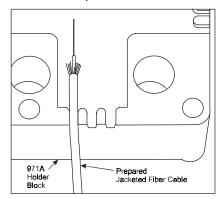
971A Holder Block with Jacketed Fiber Cable
